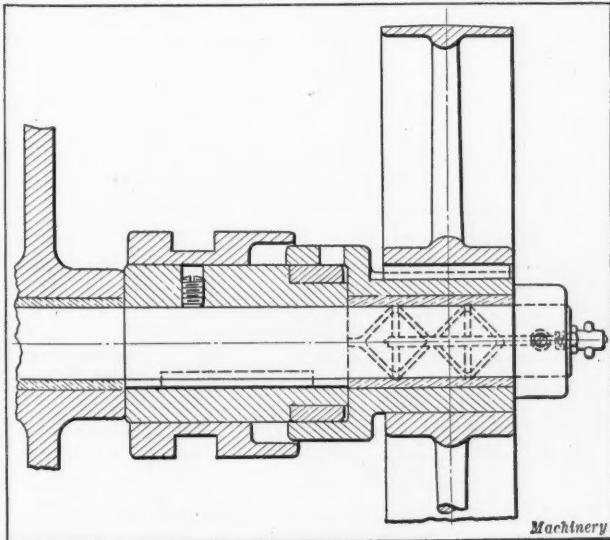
Friction Clutch arranged for starting and stopping Main Drive of Belt-driven Machine
